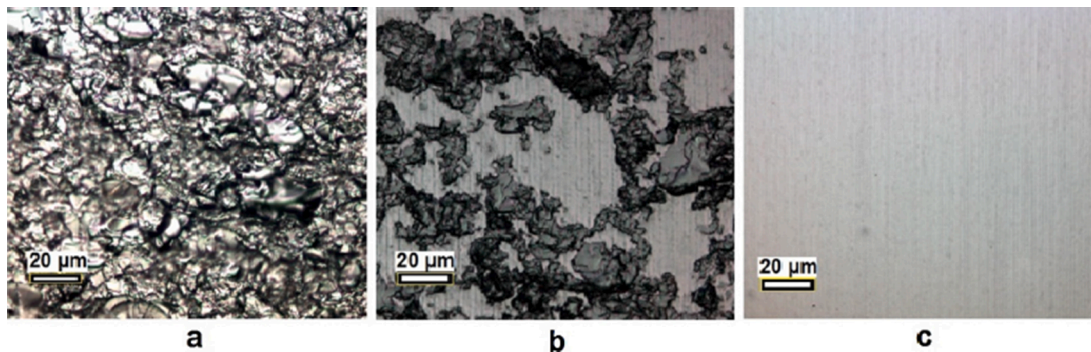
(a) Unmachined surface (b) conventional method machined (c) LAM machined [112]. [Reproduced by permission of the publisher. Permission to reuse must be obtained from the rights holder].
